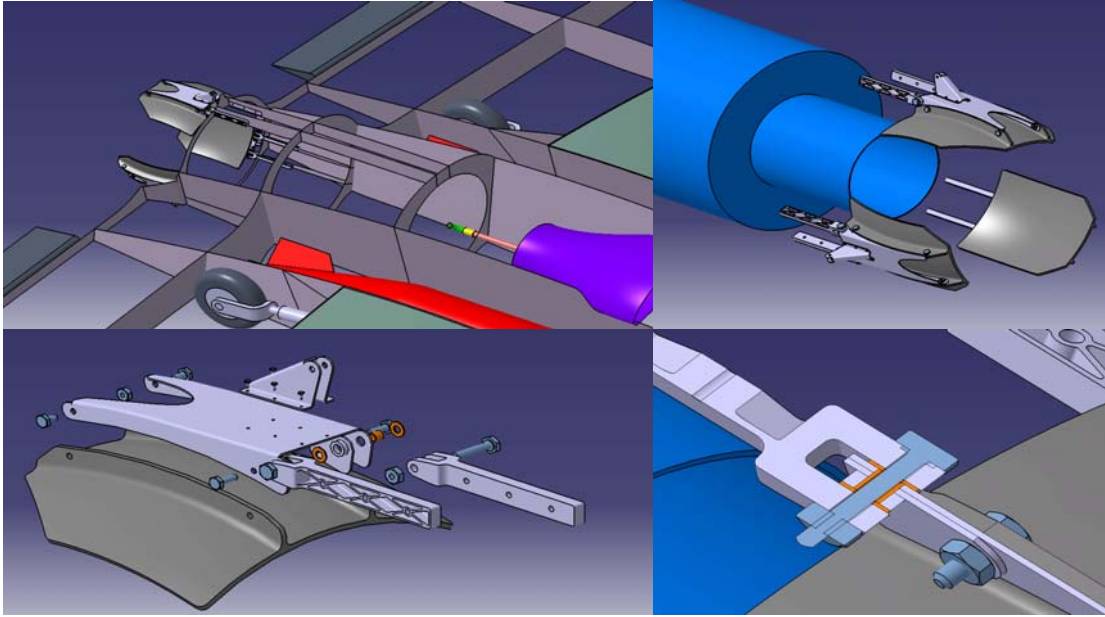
to 8-8 – The accompanying paddles supporting structure, alignment relative to the jet pipe and an exploded and sectional view of the assembly
